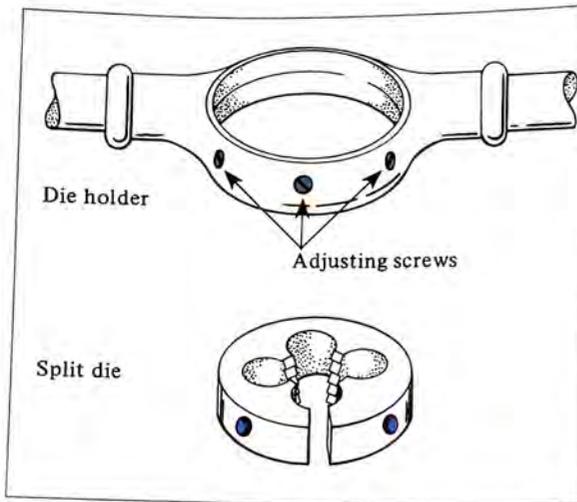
Split Die Thread Size Controlled by Three Adjusting Screws
